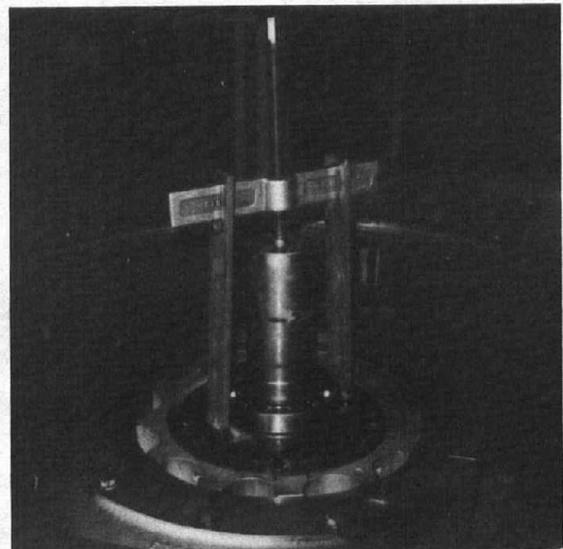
Bearing puller in place for removal of the precision bearing. The precision bearing was not removed.
